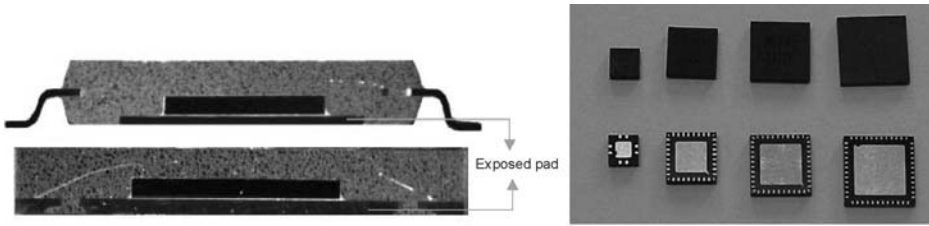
Examples of exposed pad packages; cross-section (left) and 3D view (right).
